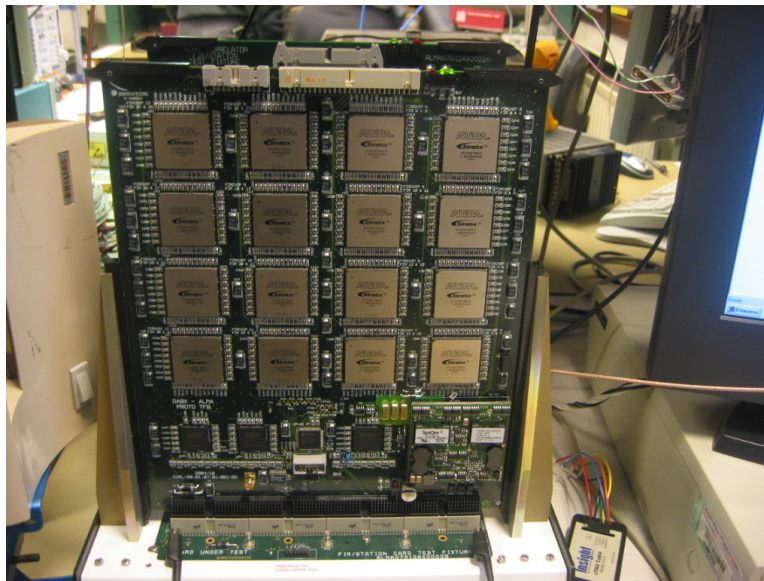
Full prototype TFB card with all 16 large FPGAs on Test Fixture.
